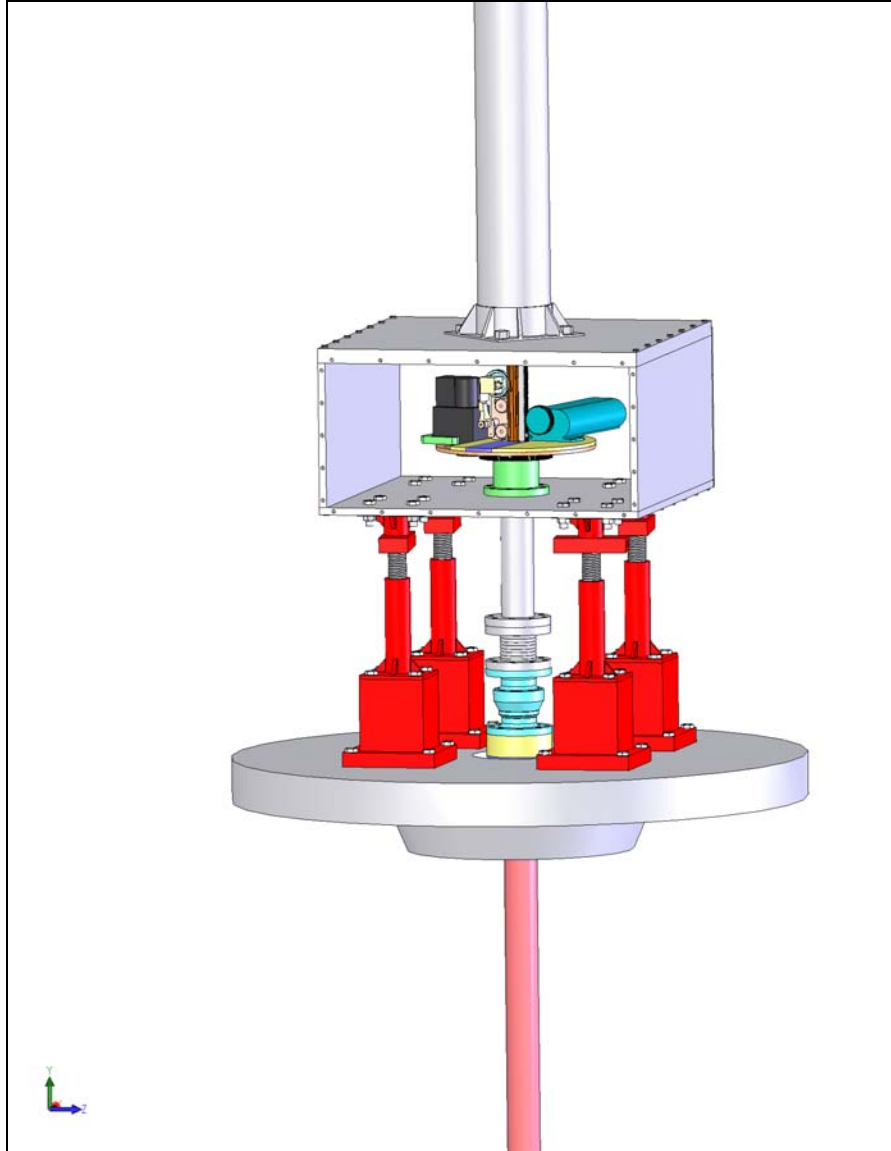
Scale Drawing of the SLIM Mounted on an Underground Storage Tank Riser
